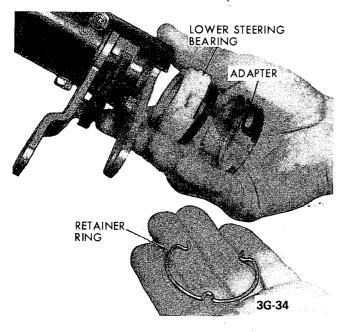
G-100 - Installing Lower Column Bearing -Manual Transmission
